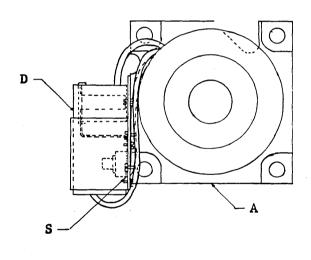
MOUNTED MOTOR, 371D911.
